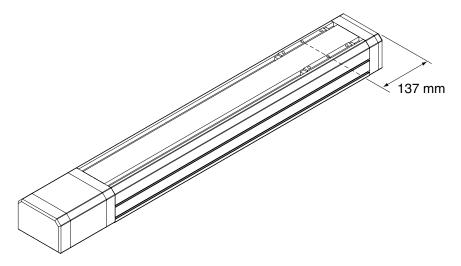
L12 Module without Brake, Shown at End of Stroke
